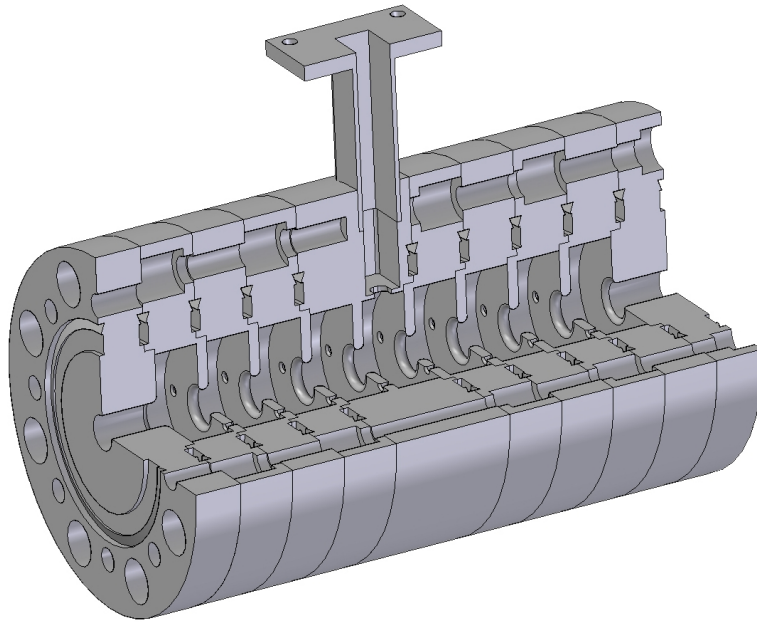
CAD drawing of the Neptune deflector with 1/4 section cutaway.
